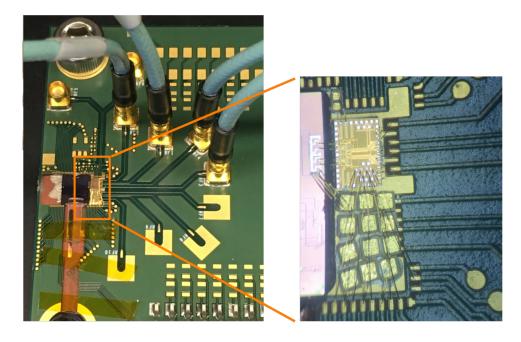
PCB Assembly of EIC and Rockley SiPh PIC.
